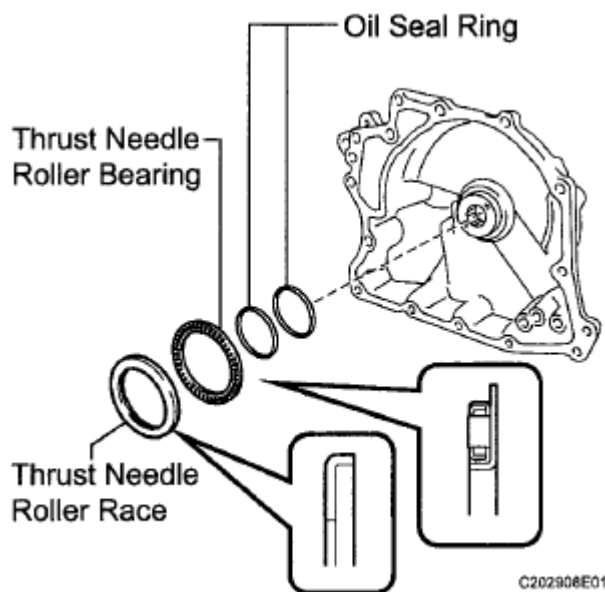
Identifying Oil Seal Ring, Thrust Needle Roller Bearing And Thrust Needle Roller Race
